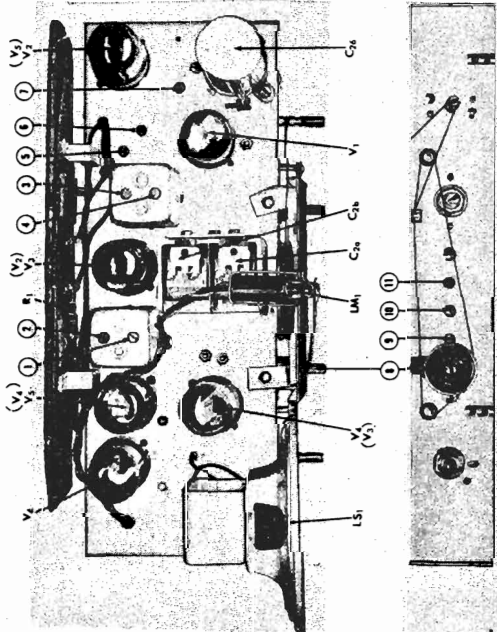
Top and front views of the receiver showing tube locations and location of padder, trimmer and i-f adjustment points.
